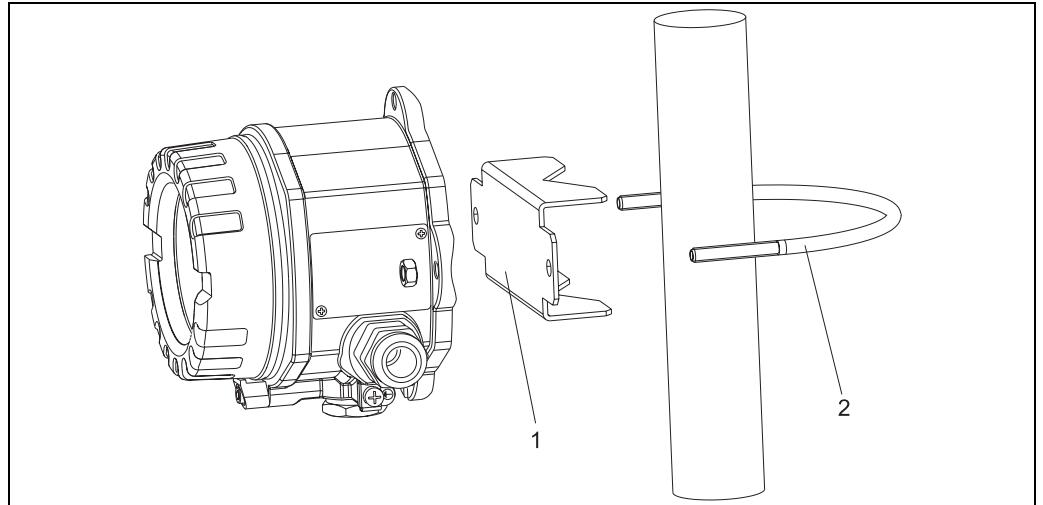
Mounting RIA141 on a pipe with mounting bracket for pipe diameter 1.5-2.2"
